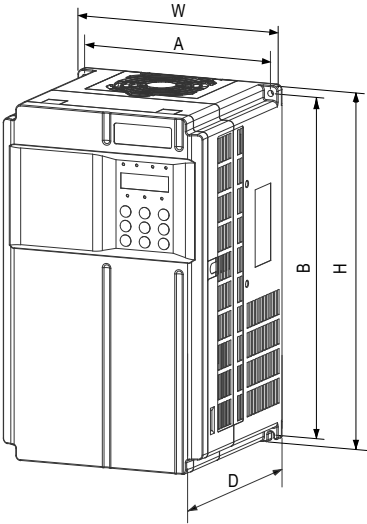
Mounting dimensions of IS580 sheet metal housing (IS580T080-R1-1 to IS580T210-R1-1)
